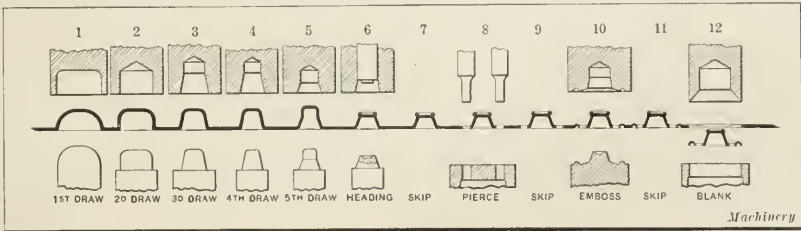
View of Upper and Lower Set of Tools and Strip, showing Progressive Steps in making Stud
